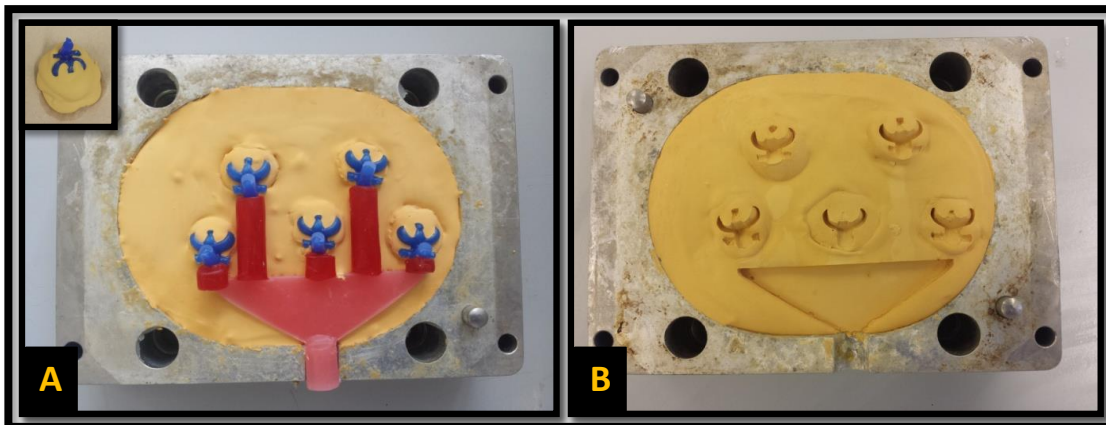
A. Wax clasps invested and flasked using type-IV moulding diestone; B. mould being left to dry overnight before injecting the PEEK polymer
